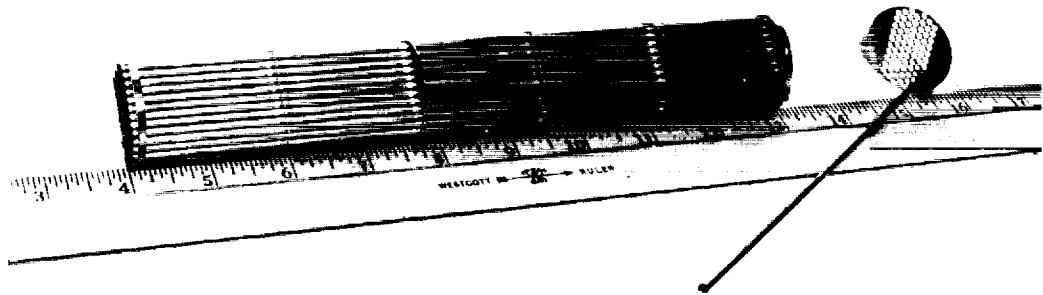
HEAT EXCHANGER MODULE TUBE BUNDLE
